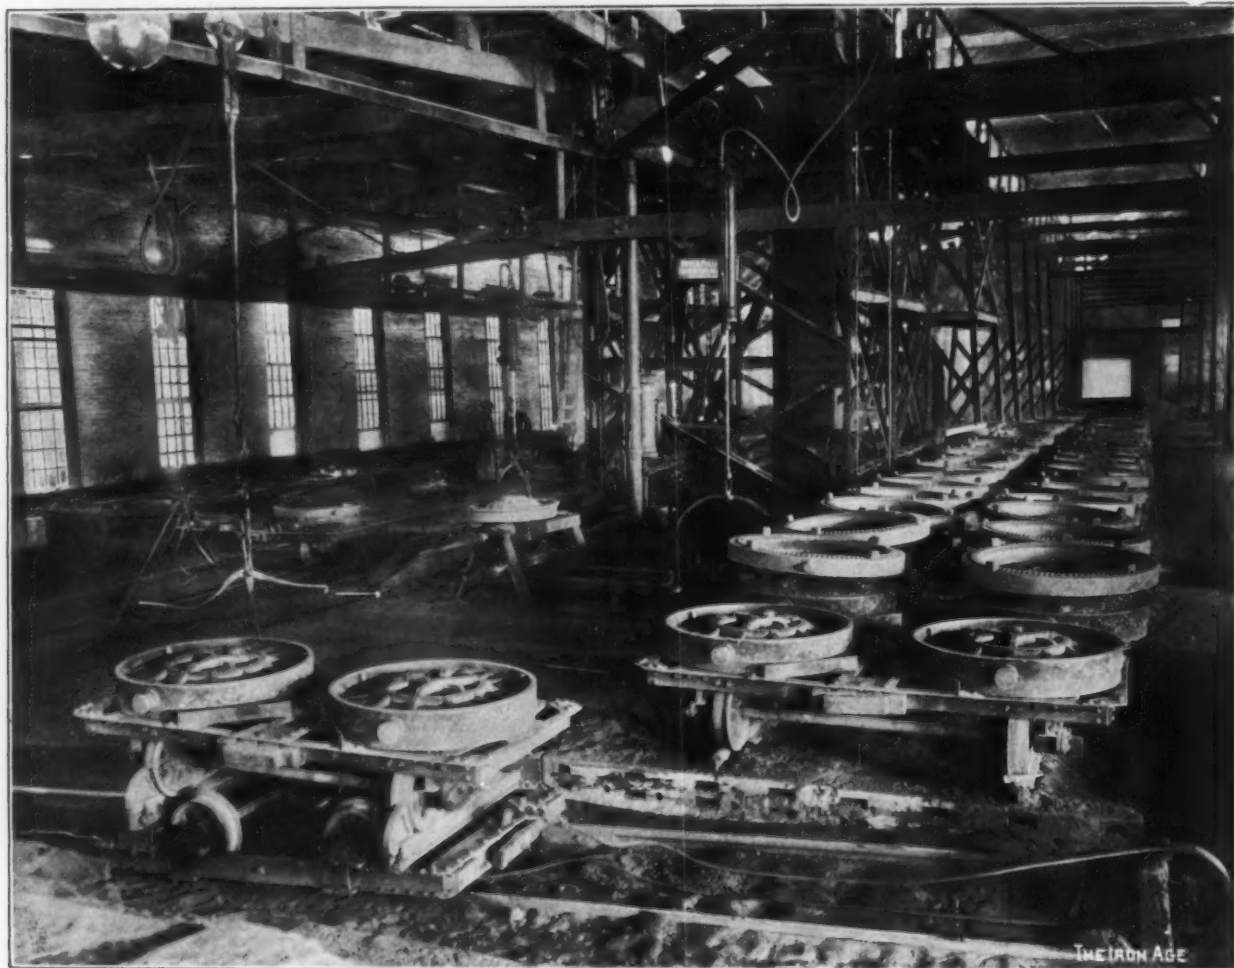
Shake-Out Transfer Car.—Flasks on Truck Returning to the Molding Machine.—Sand Handling Equipment on Steel Supports Is Shown, Also Trolley Tracks.
